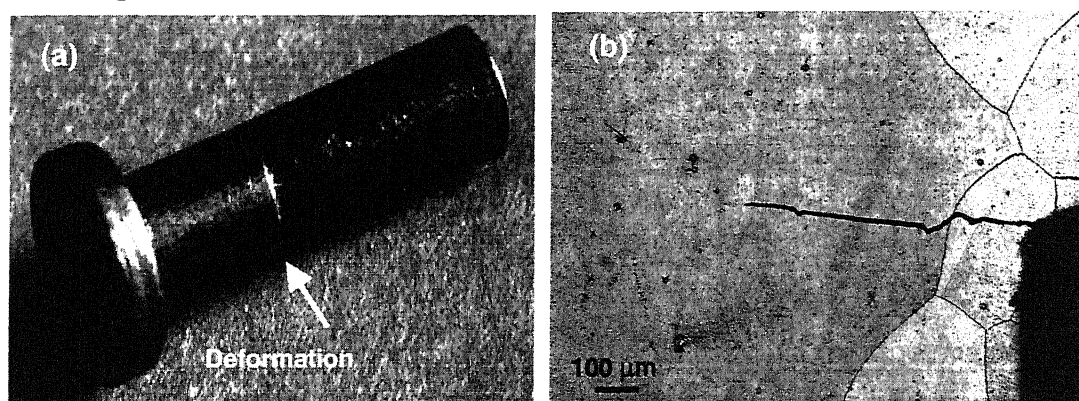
(a) Photograph showing circumferential deformation on the pin and (b) cross section of the pin showing fatigue crack at the deformation mark
